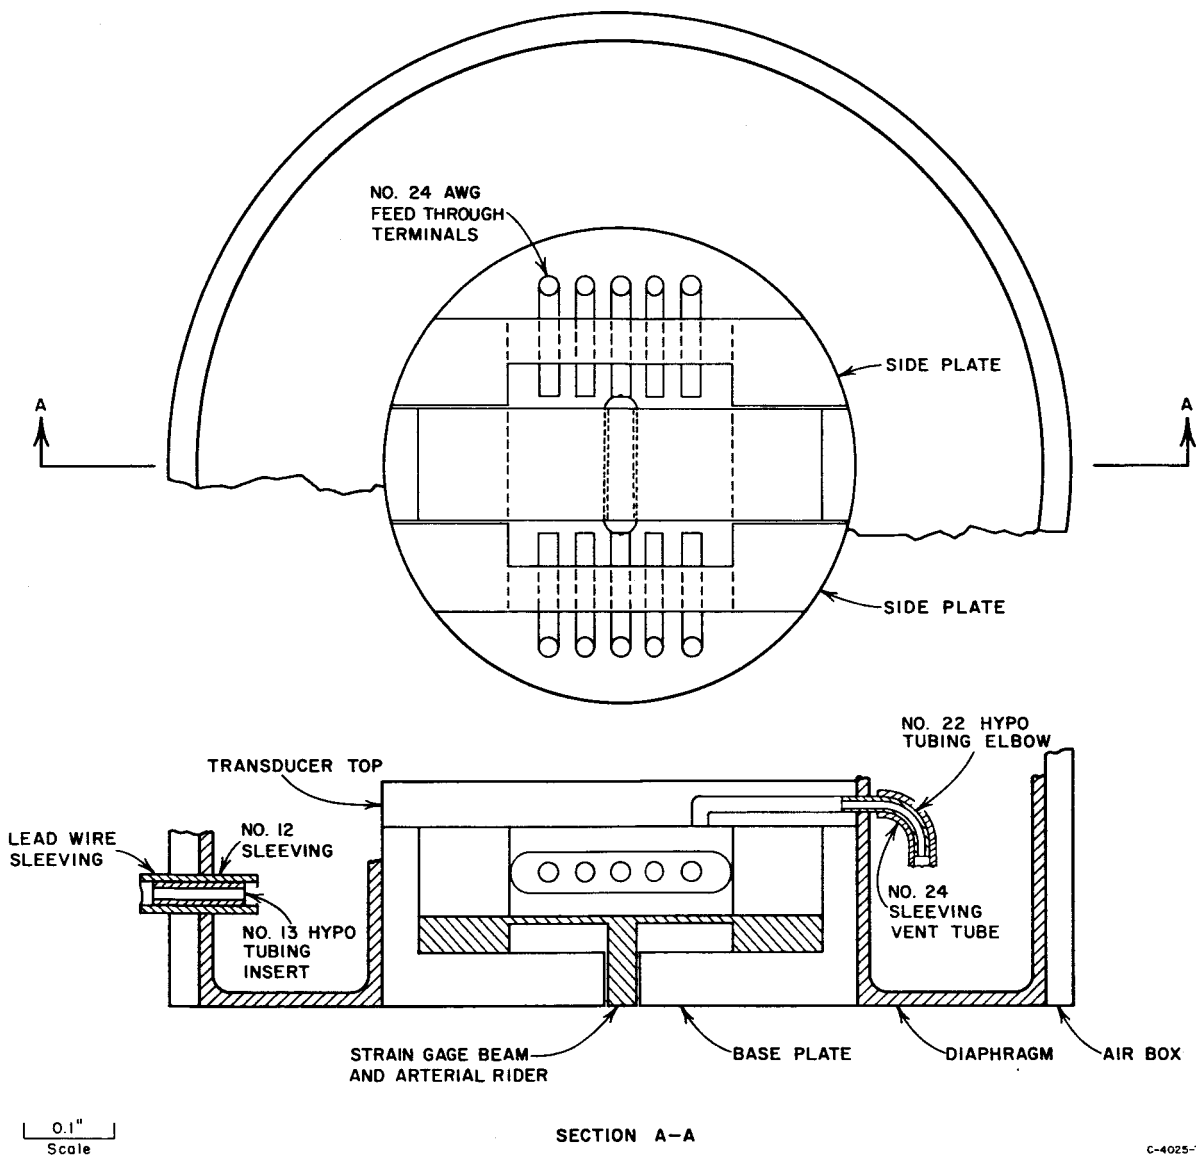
TRANSDUCER CONSTRUCTION DRAWING
